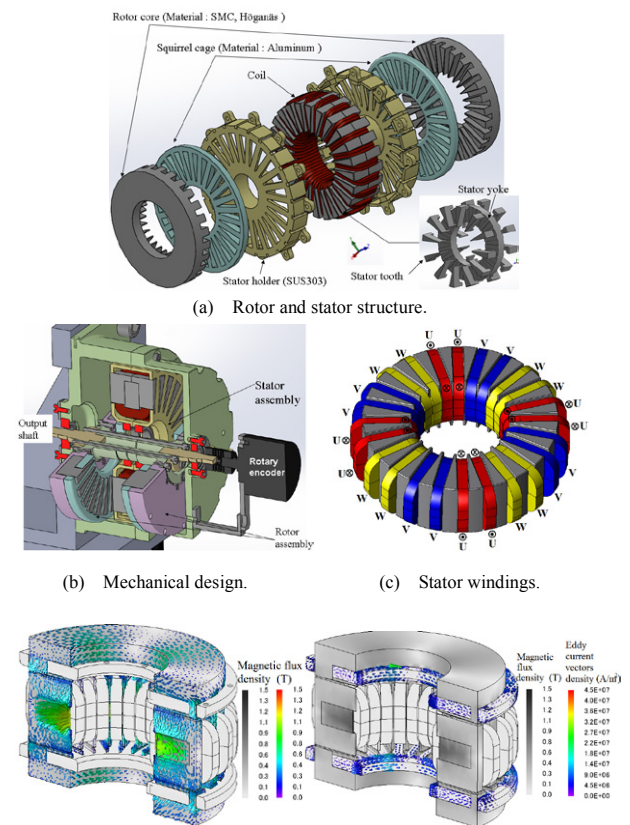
Prototype of proposed pancake axial-gap induction machine.
